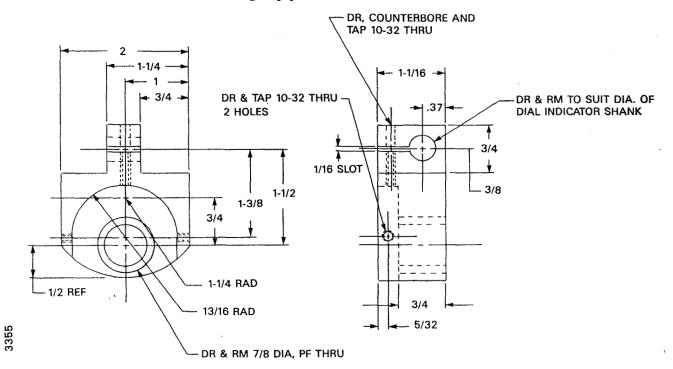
Detail of Tool for Parallel and Angle Valve Cylinders With Rocker Arm Shaft
